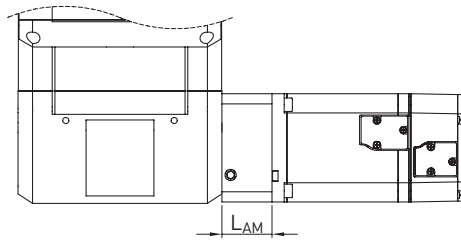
Motor connection of linear table HT-B without gearbox
